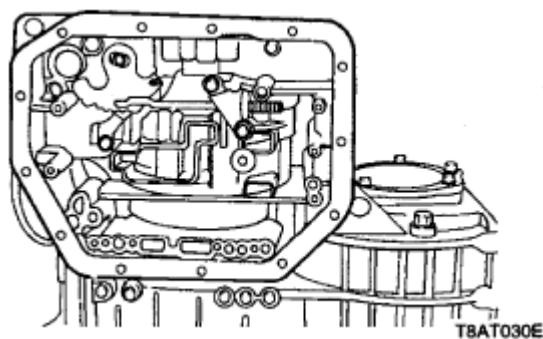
Identifying Detent Spring Assembly & Sprag Rod Support
